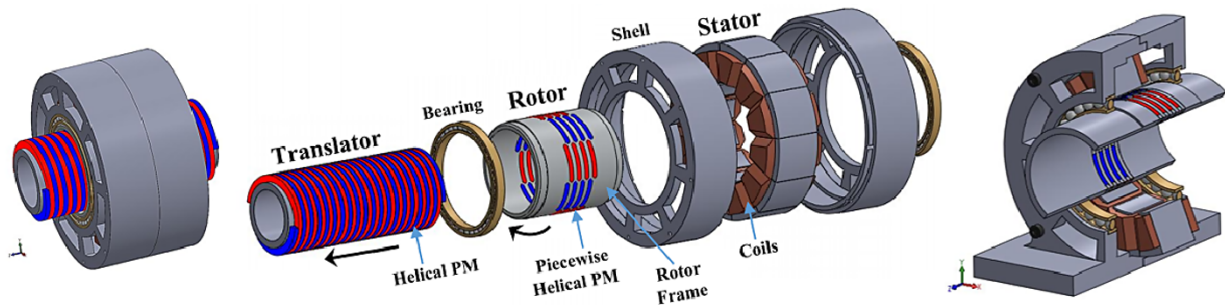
Compact, Exploded and Perspective Cross sectional views of *RotLin
